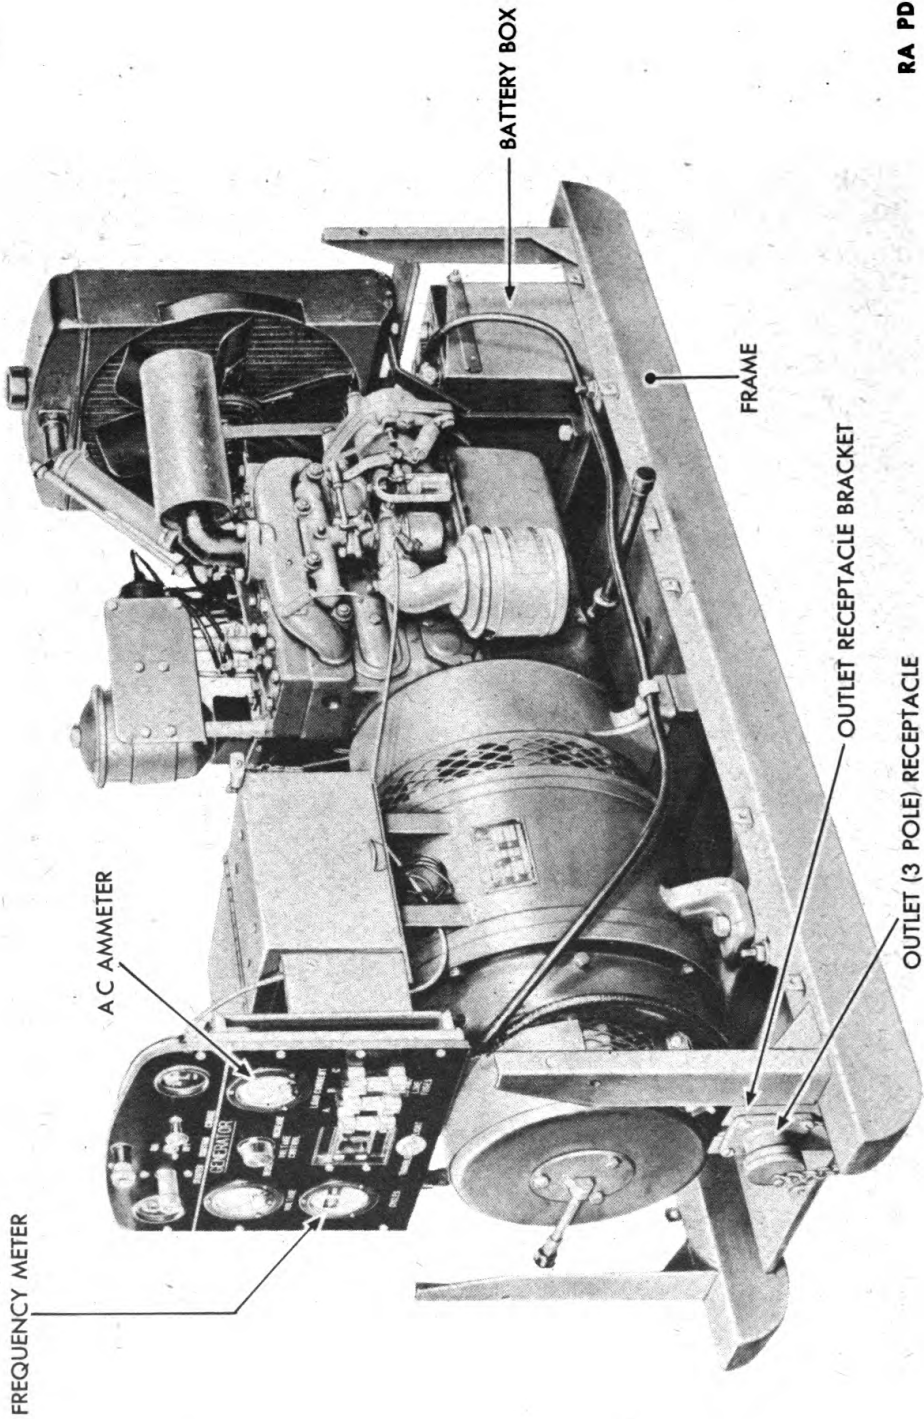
Generating Unit M5 — Canopy Removed — Right Rear View
